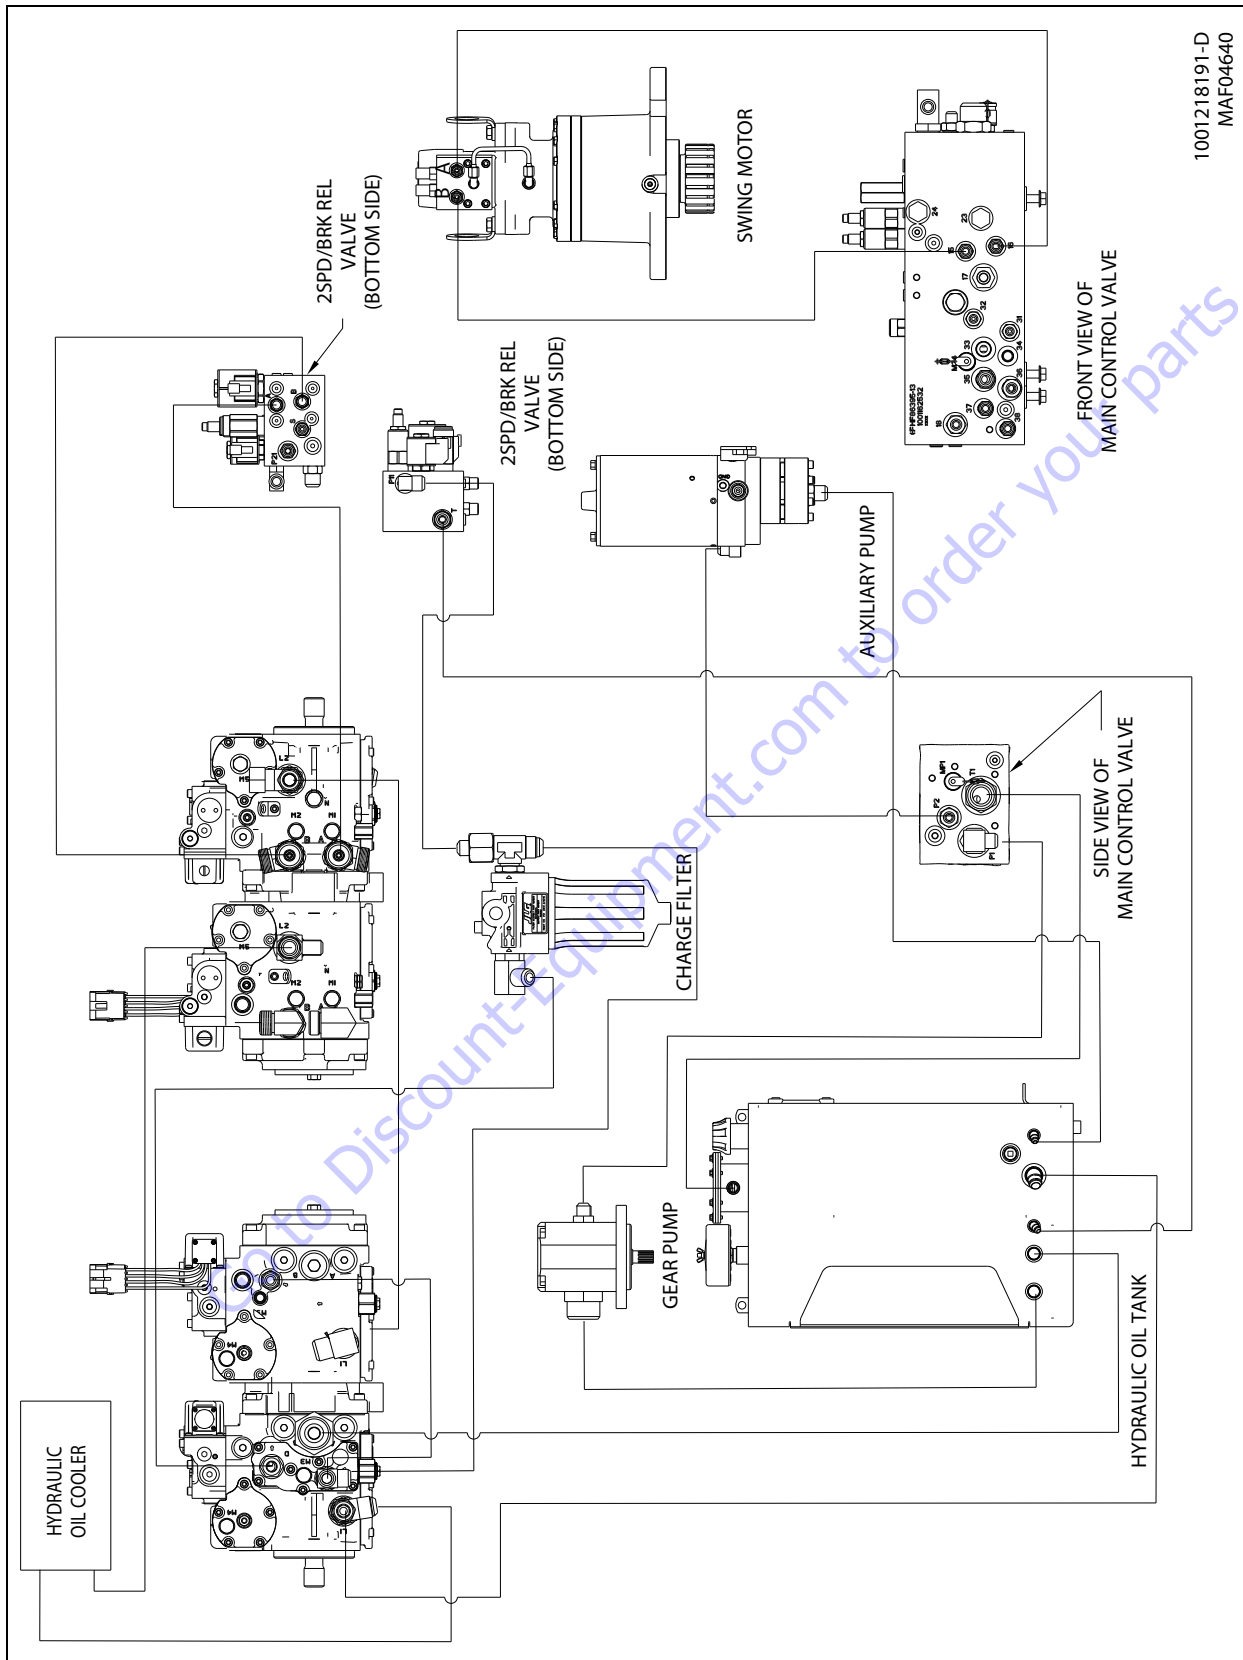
Hydraulic System Installation (4605JC) - Sheet 3 of 15
